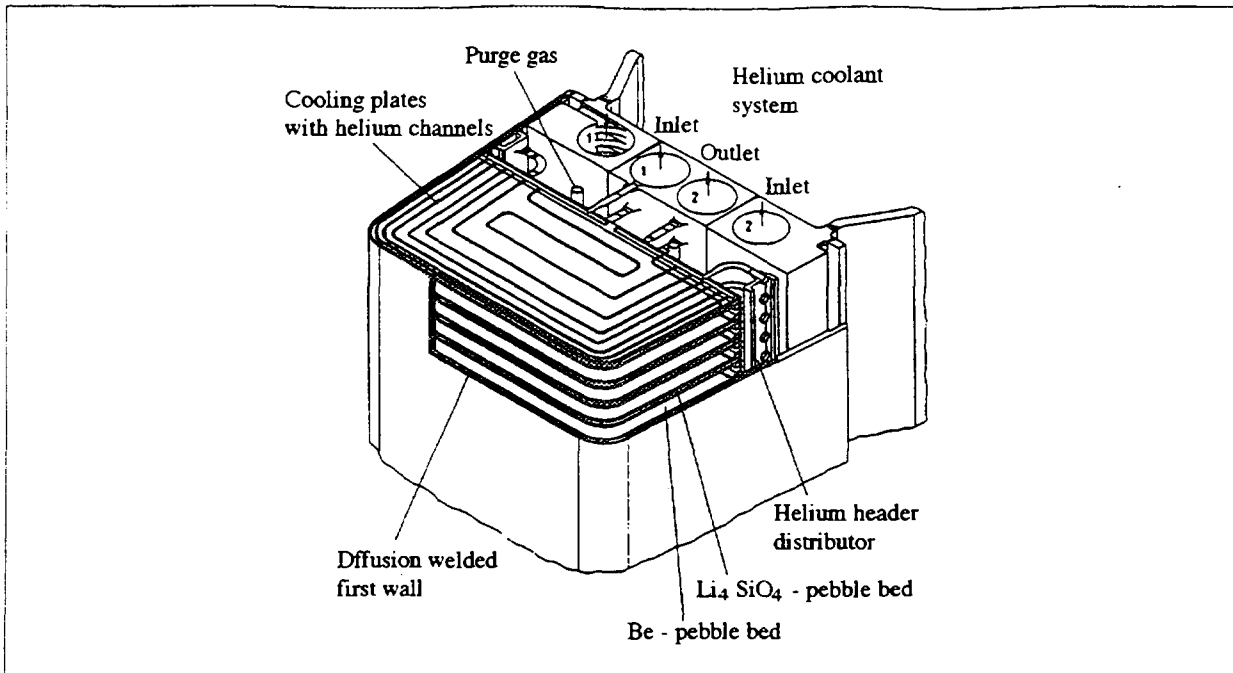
Isometric view of a poloidal part of the outboard blanket segment in the BOT concept (from [5])
